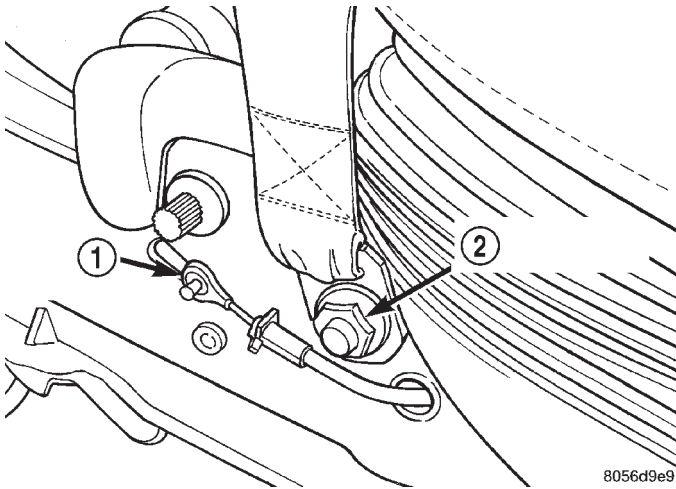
Lower Seat Belt Anchor And Recliner Cable
